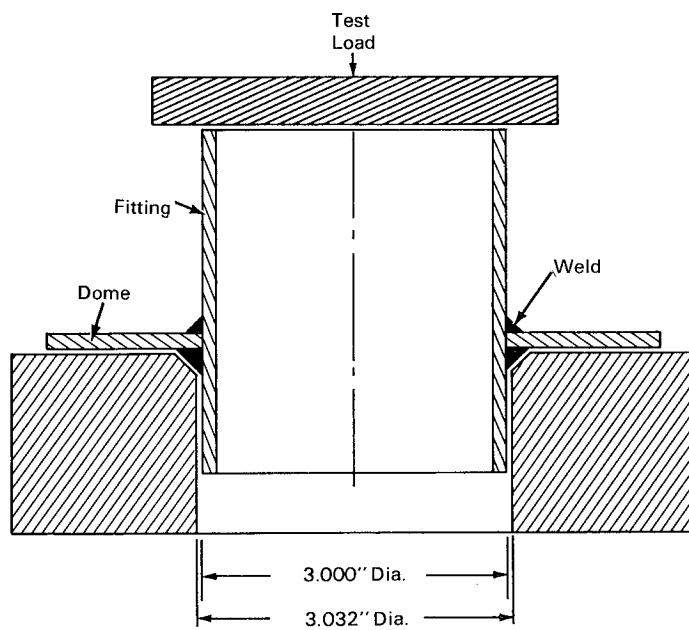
Section of Test Shear Fixture and Simulated Fitting-To-Dome Weld Sample
